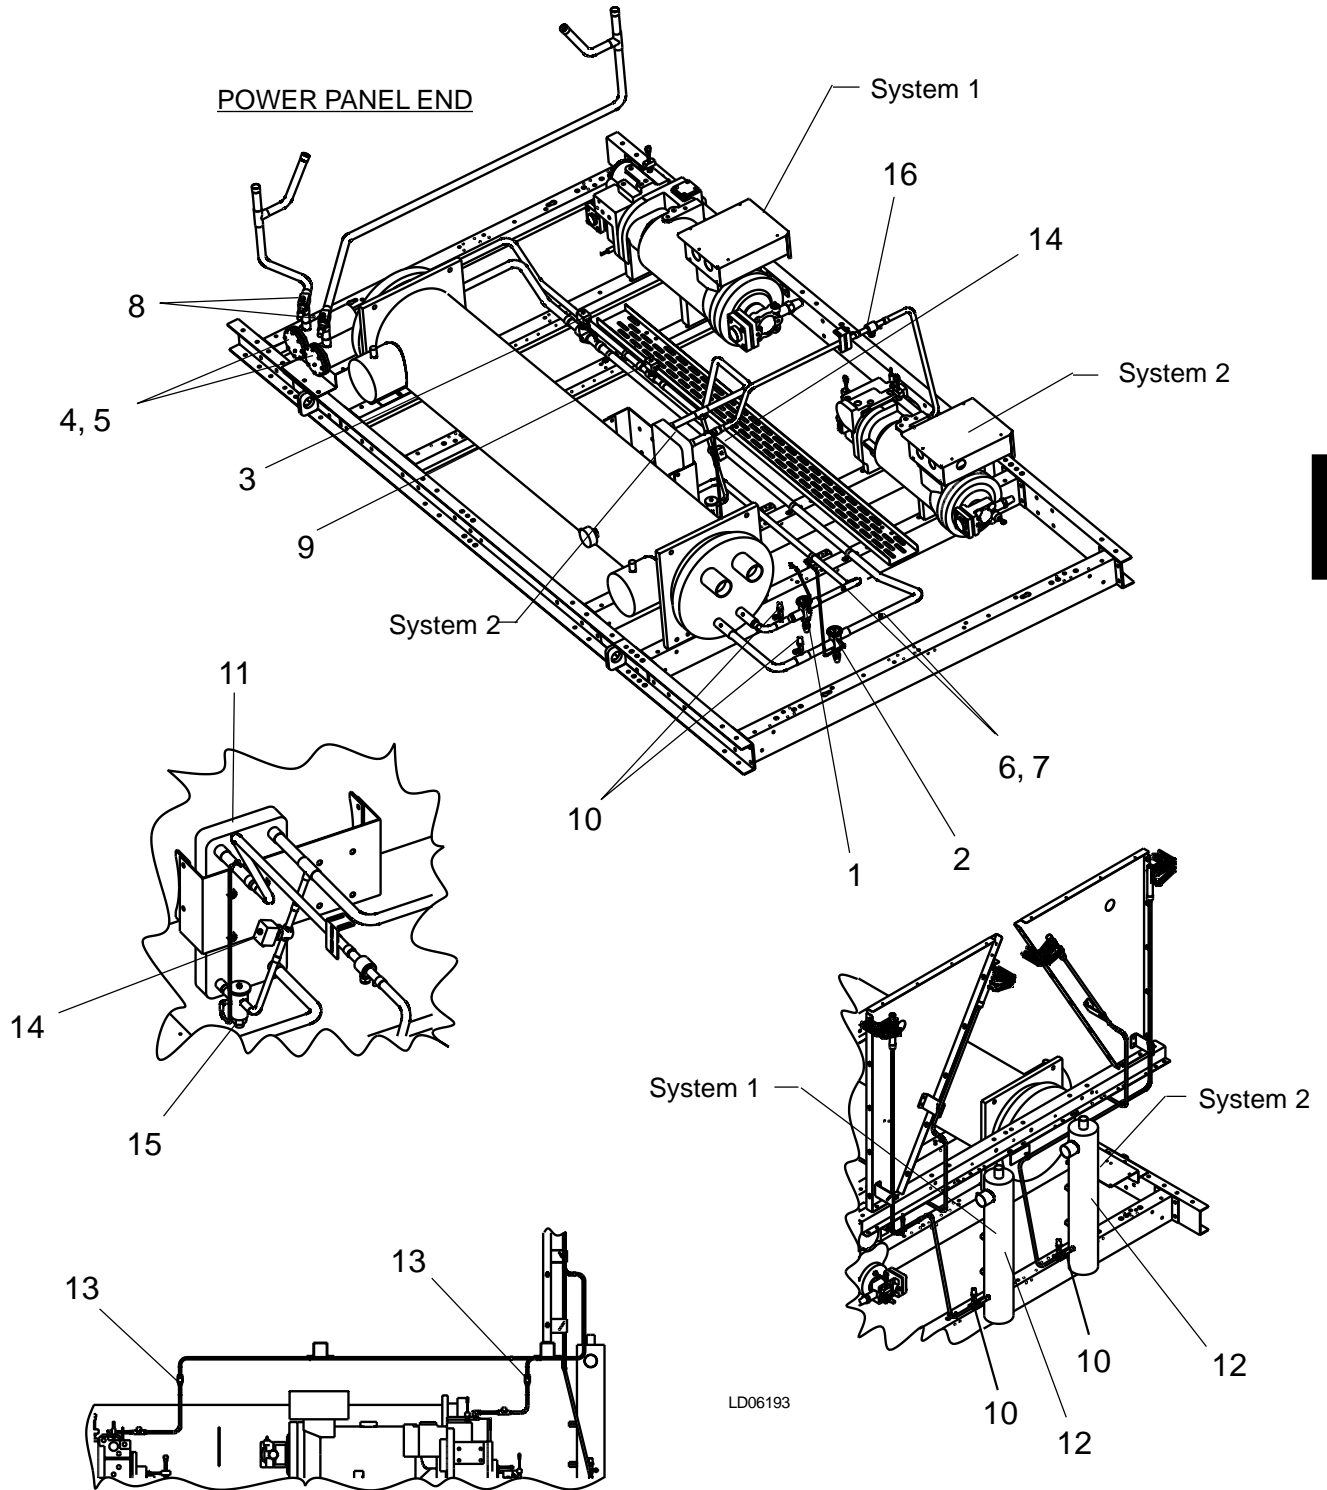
PIPING COMPONENTS (REF. TABLE 7, PAGE 14)
